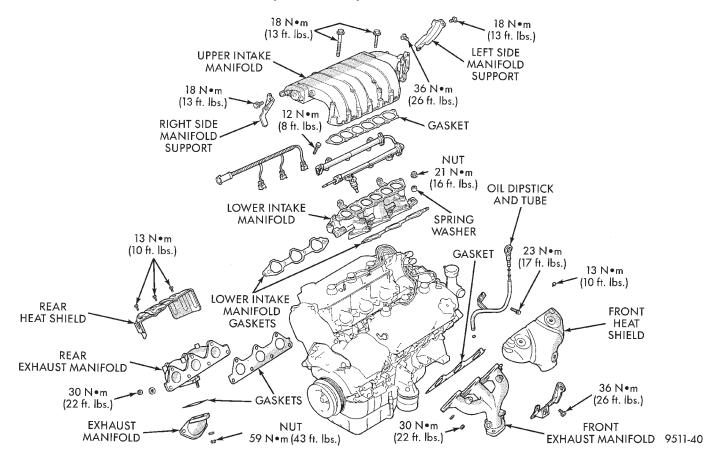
Intake and Exhaust Manifolds—2.5L Engine
